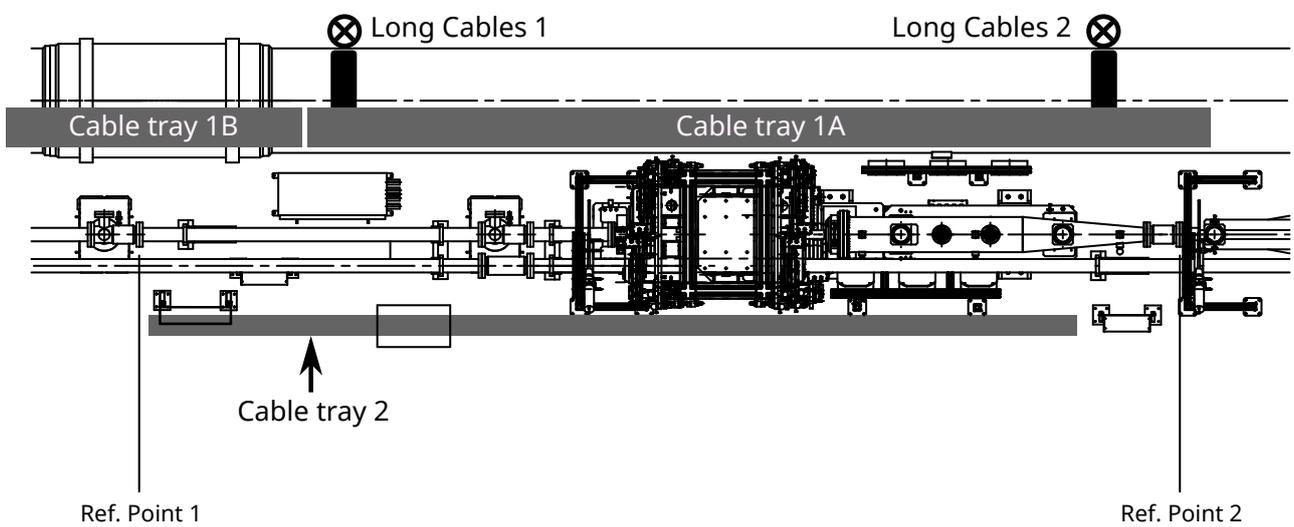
Top view of the BGV setup, indicating cable trays "1A" (already installed), "1B" and "2".
